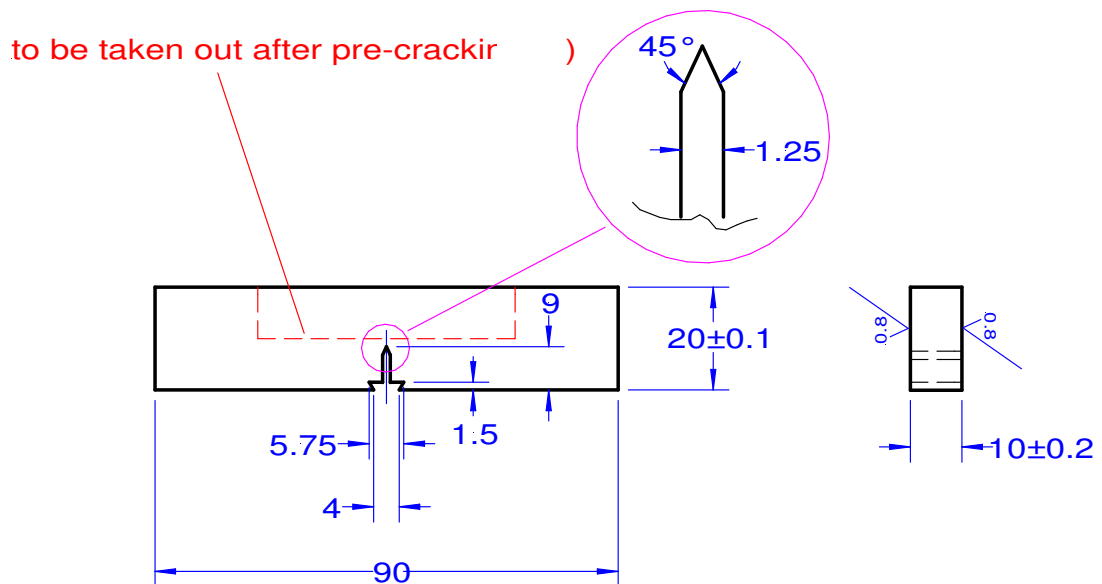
10 x 20 mm type B-like bend bar to be pre-cracked and subsequently machined to the final dimensions of the type D specimen, including a 1 mm deep crack.
